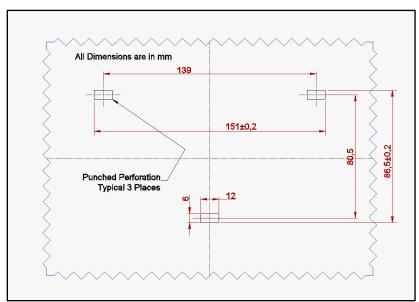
CONVEYOR SIDE FRAME ELEVATION VIEW OF PERFORATION
